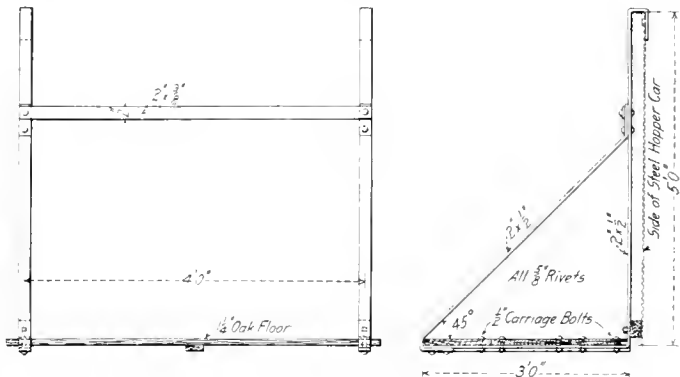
Riveting Platform for Sides of Steel Hopper Cars.
